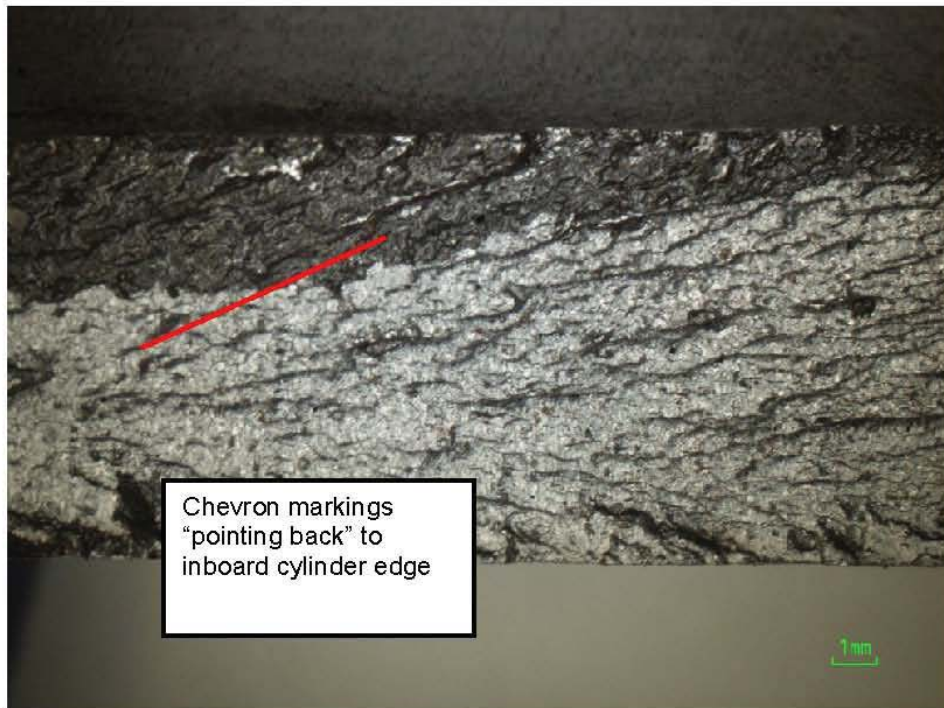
Showing the markings present upon fracture surface 'B2'.
